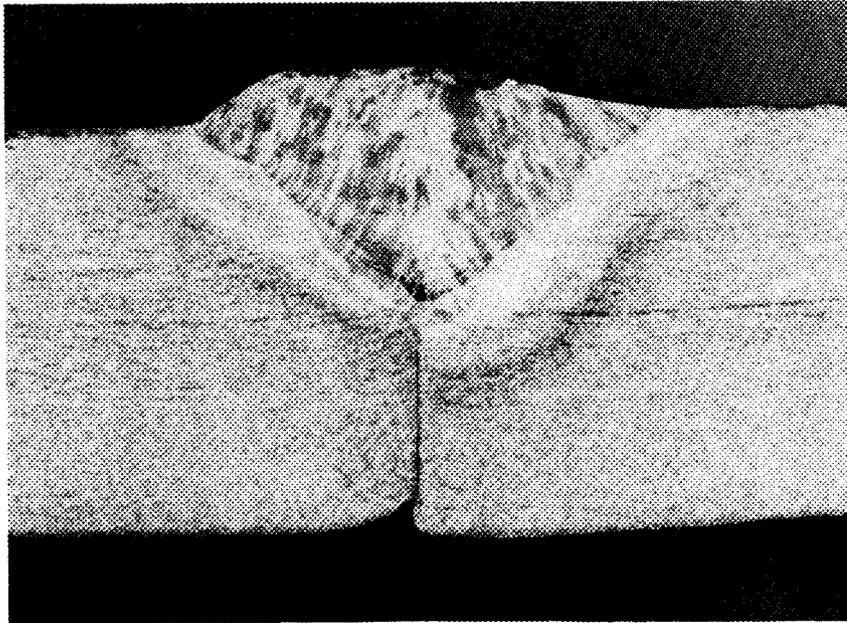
Type 316 SS drum wall specimen (9X), etched.
